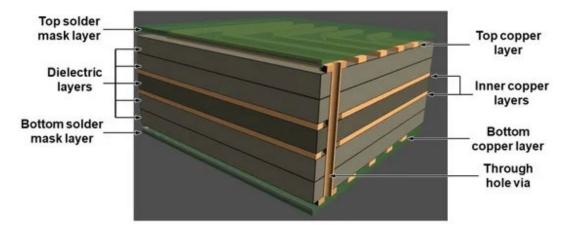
A 3-D schematic design of a multi-layer printed circuit board (PCB) board composed of four copper layers (two internal layers), five dielectric layers, and the top and bottom mask layer.
